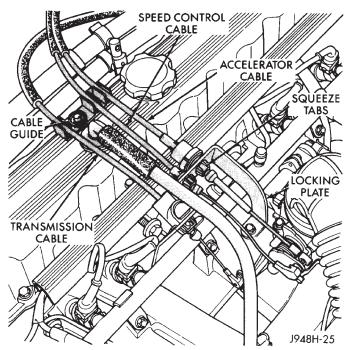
Cable Guide and Squeeze Tabs—Typical
